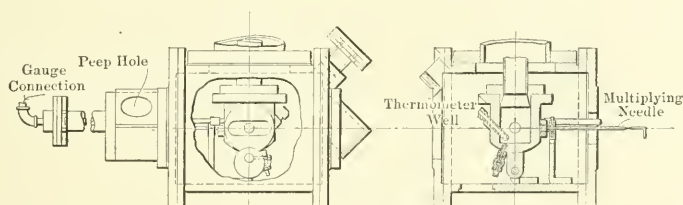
END VIEWS OF SEARCH-TUBE END AND OF CONDENSER END.
